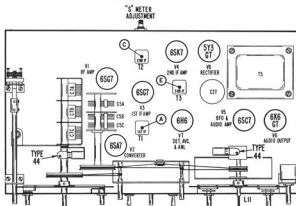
Top View of Chassis Showing Tube Locations and Alignment Adjustments
